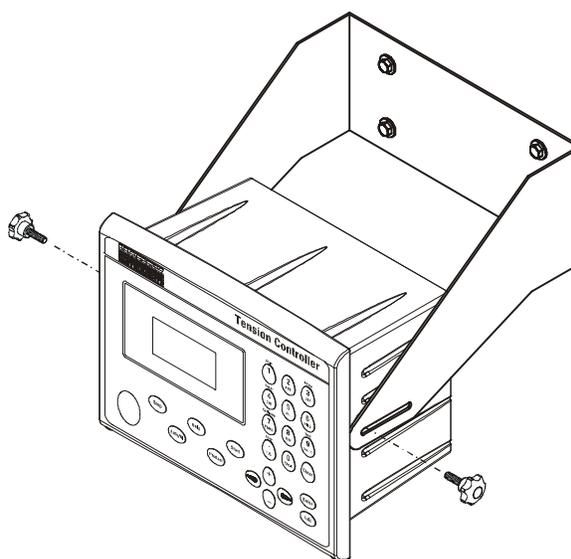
TENSION CONTROLLER INSTALLING IN A SWIVEL WALL MOUNT
